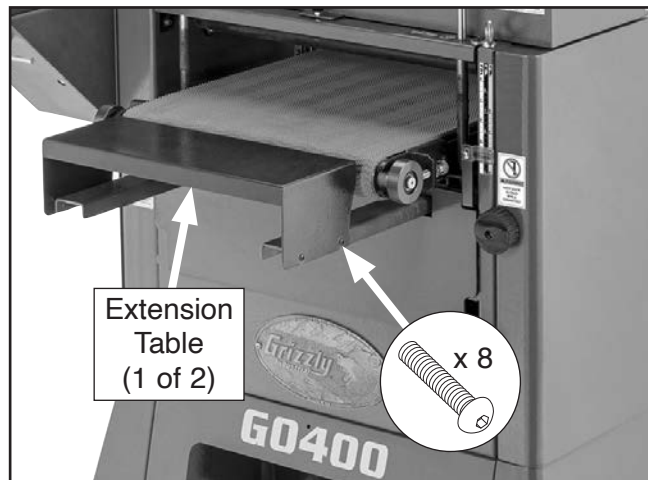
Extension table mounting brackets attached to conveyor table.
